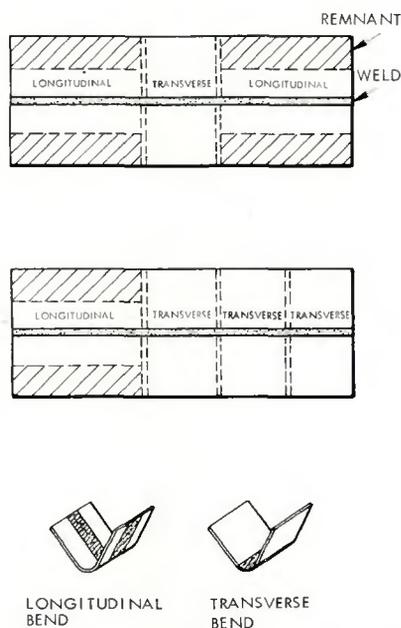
Sketches showing sectioning of a set of EB weld specimens into bend test specimens and orientation of the specimens with respect to the weld bead
